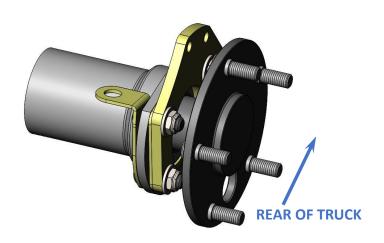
Primary Caliper Bracket Installed (DB1572BR LH Side Shown)
